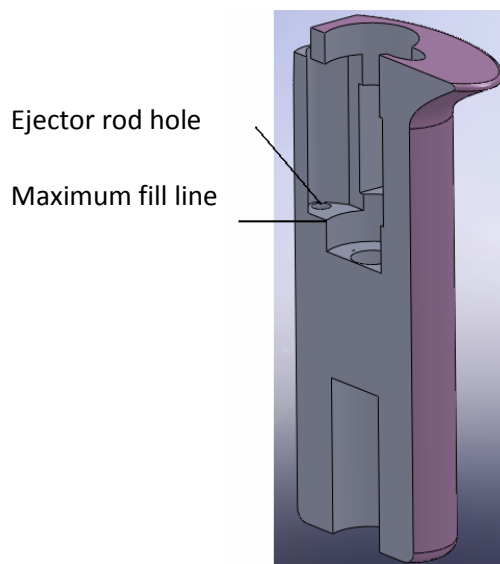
Standard micropipette grip with internal components removed and notch cut out for MiniFix.
